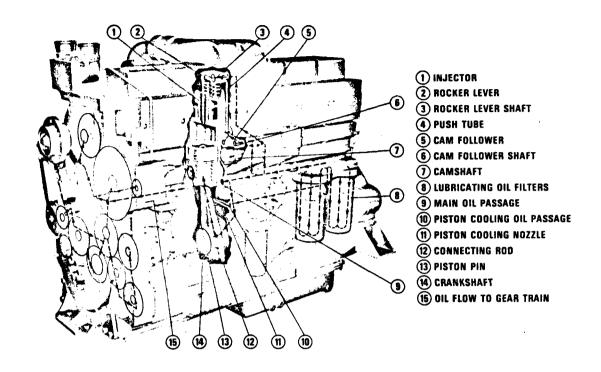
, (LWC-28). Lubricating oil flow - KT(A)-1150 Engine
